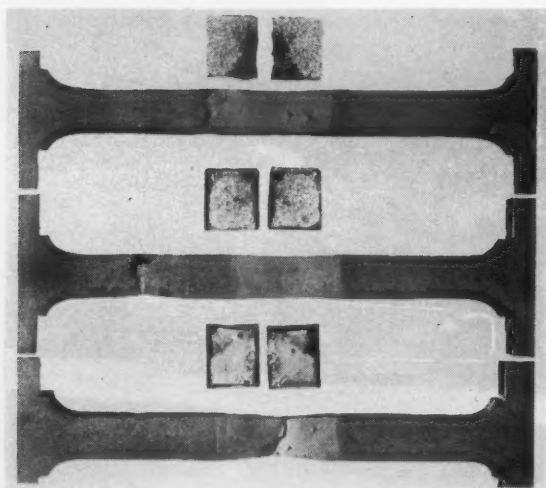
TENSILE IMPACT TESTS SIMULATE FIRING LOADS. THE STRIKING VELOCITY OF LOAD WAS 21.35 FEET PER SECOND. ENERGY OF RUPTURE 1668, 1718 AND 2141 FOOT POUNDS FROM TOP TO BOTTOM, RESPECTIVELY. FRACTURES OCCURRED AT IMPERFECTIONS IN WELD OR CASTING AS SHOWN BY THE RUPTURED SECTION.
